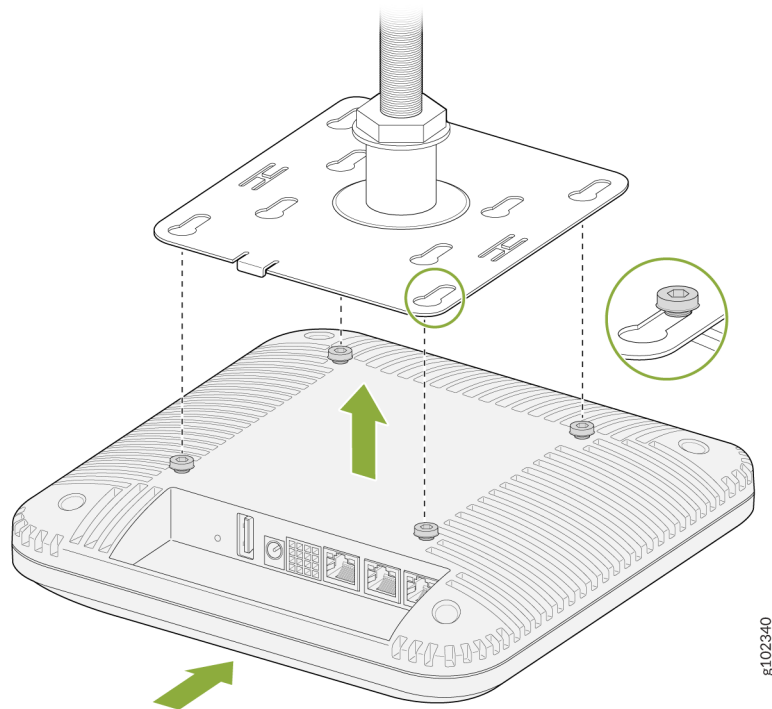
Attach the APBR-T58 Bracket to a 16-mm Threaded Rod
